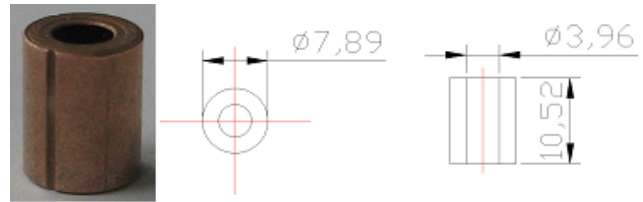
Shape and dimension of the sample specimens used in the experiment
